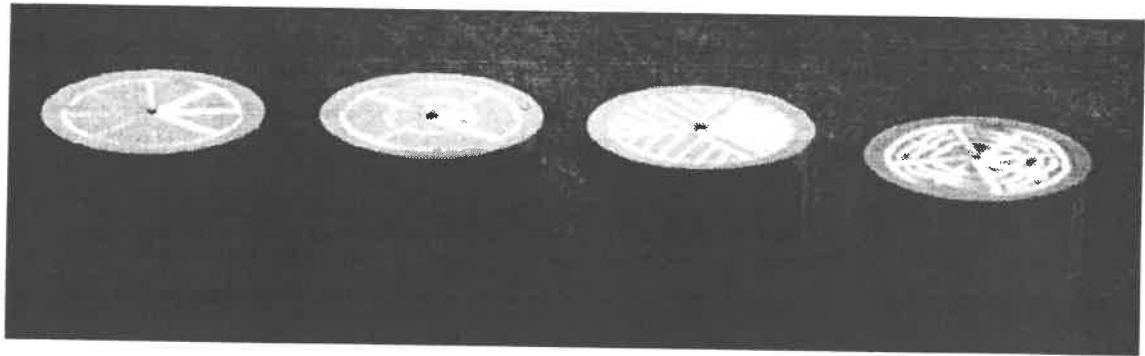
Picture of the manufactured air bearings with the fast tool servo system.
